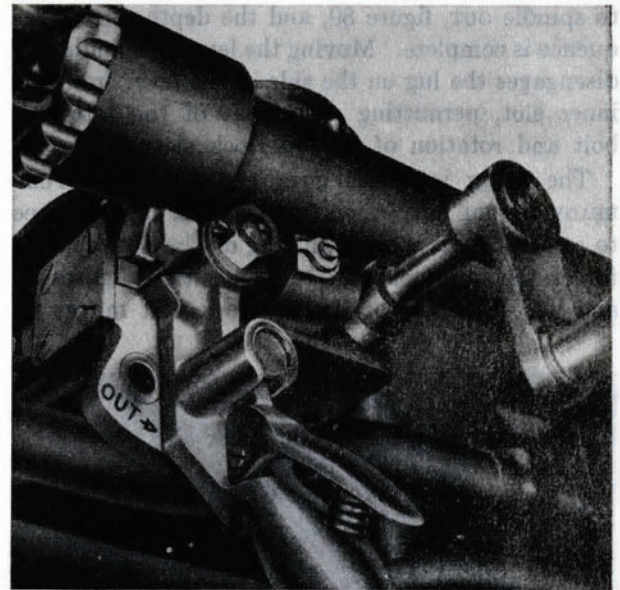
Depth Setting Mechanism Installed—Right-Hand Tube—Spindle Locked OUT.
